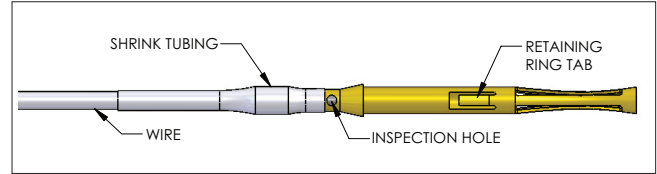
Figure C. Contact retaining tab must be aligned with the contact locator positioning slot.
